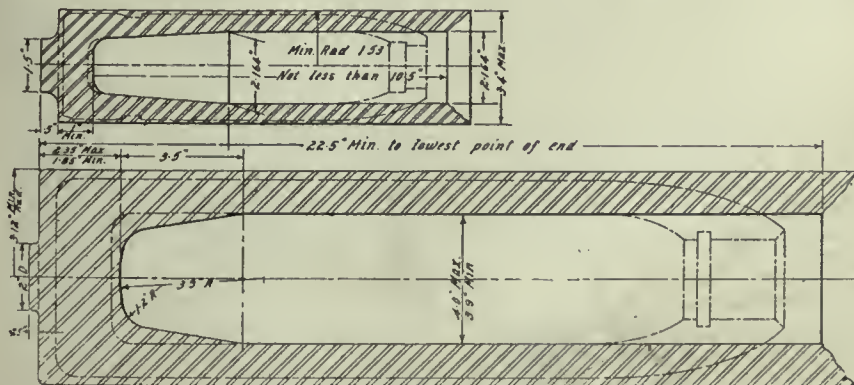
75-MM. AND 6-INCH SHELL FORGINGS
